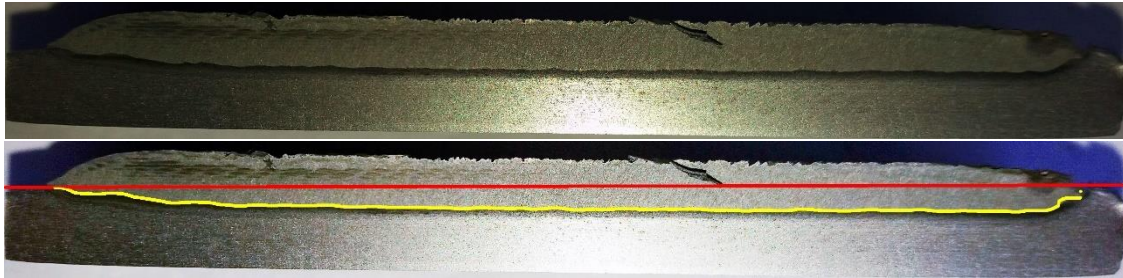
Longitudinal cut of the weld bead (above). Weld bead depth profile (yellow line) and base surface (red line) on the same picture (below), obtained using image processing algorithms.
